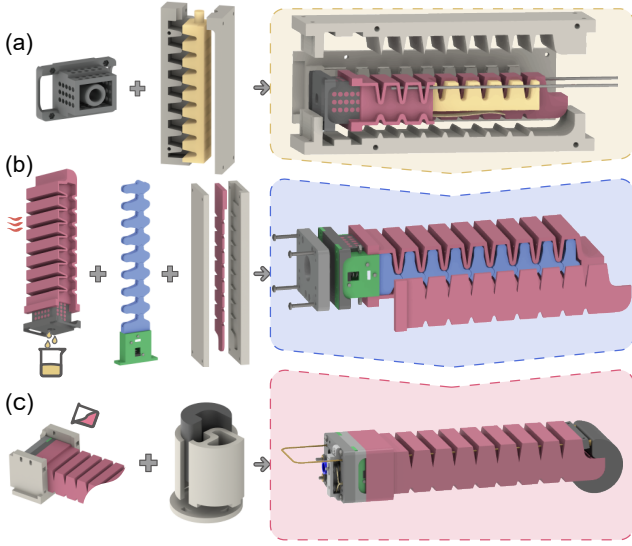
The fabrication process of the proposed BTSA. (a) Fabricating the soft chamber. (b) Fit the BLSs. (c) Assemble other components.
